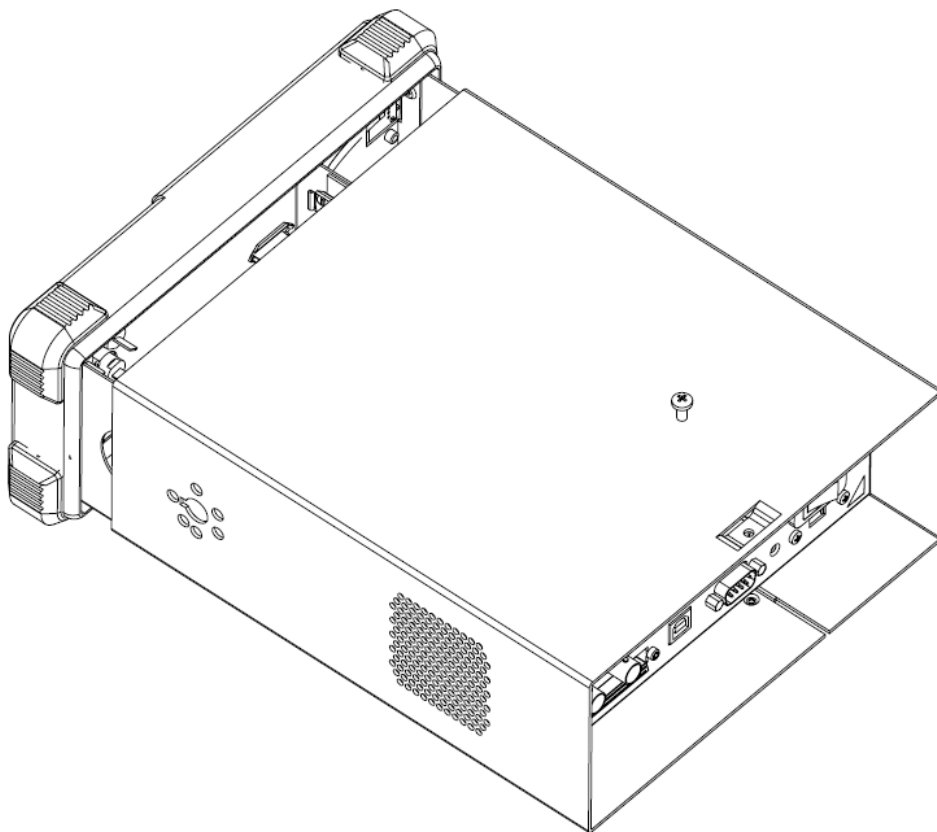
The Schematic of Disassembling and Assembling Metallic Shell
